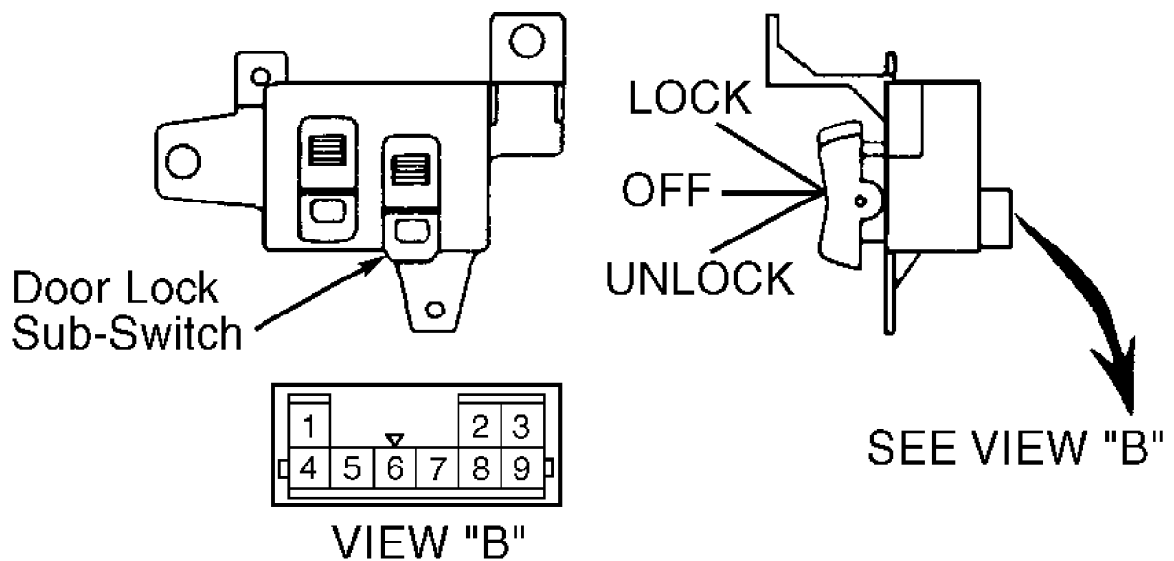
Inspecting Door Lock Sub-Switch (Montero)
